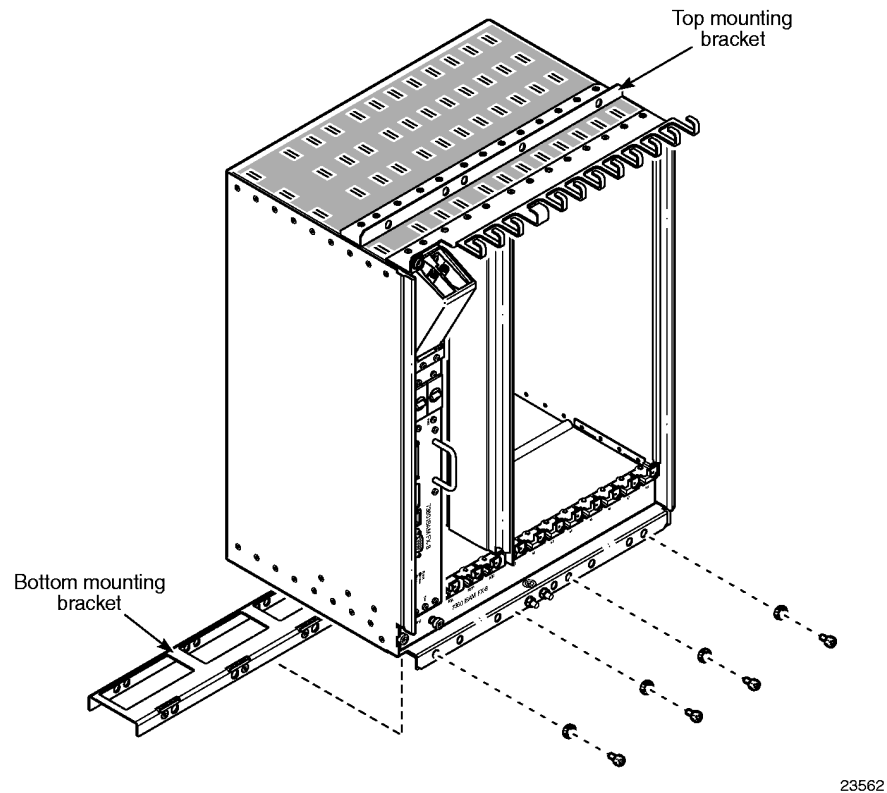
Mounting the 7360 ISAM FX-8 pre-assembled shelf mounting bracket and air intake baffle/drip tray in a 19 in. rack
